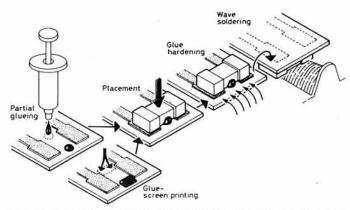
An alternative mounting procedure whereby glue is used to hold the component to the board during flow soldering, making subsequent removal of components rather tricky as it is easy to damage the board
